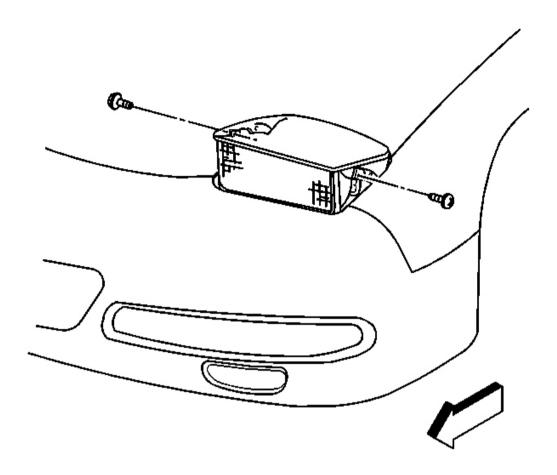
Headlamp Opening Door At Headlamp Courtesy of GENERAL MOTORS CORP.
